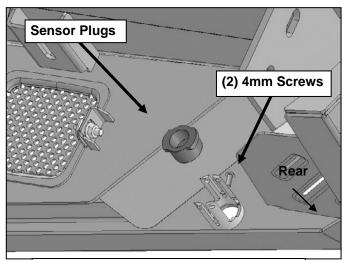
Attach driver/left Frame Bracket to Bolt Plate
